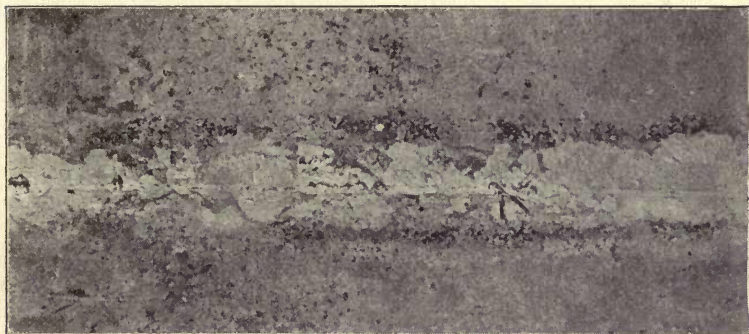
UNDER SIDE OF WELD MADE BY "POOL" WELDING.
